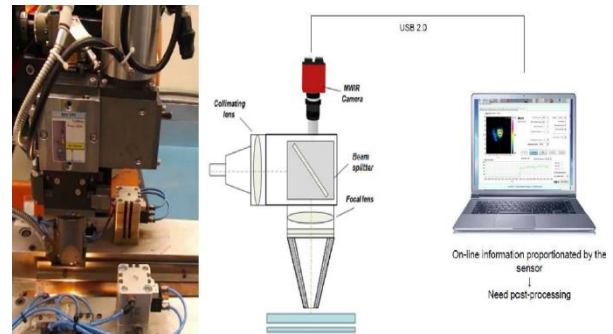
CS-mount camera port in a TRUMPF Laser TruDisk BEO D70 welding head (example)
